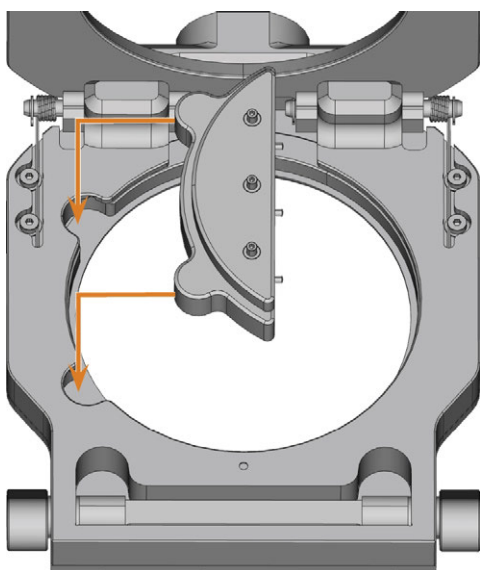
INSERTING THE BLOCK HOLDER INTO THE BLANK HOLDER
